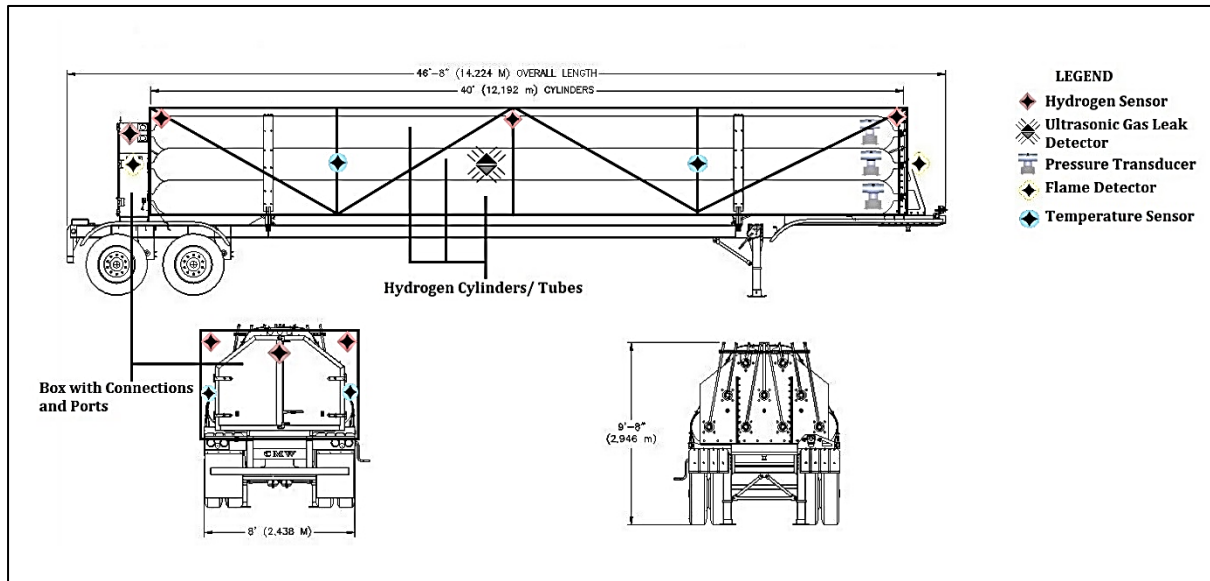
Schematic of the recommended sensor system in a tube trailer with roof [adapted from (City Machine and Welding, 2022)]
